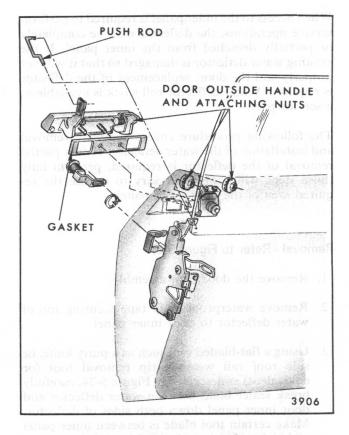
Outside Handle Removal (Lift Bar Type)
